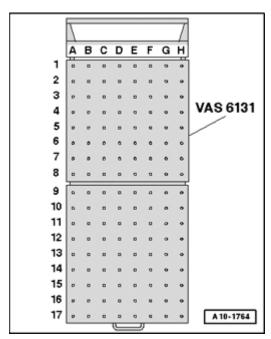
Identifying Scissor Lift Platform VAS 6131 Courtesy of VOLKSWAGEN UNITED STATES, INC.
